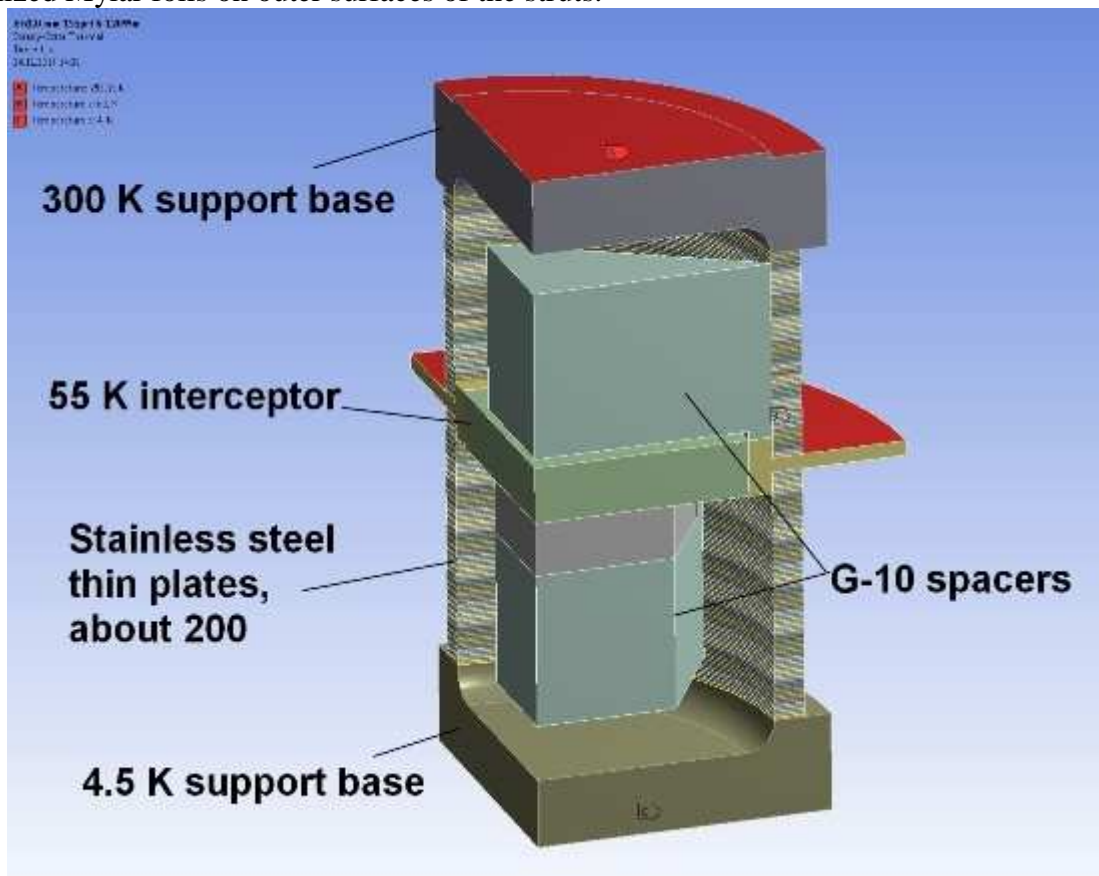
View of the support struts. It consists of stainless steel plates of about 200 pieces. Inner G-10 block spacers fix position of the stainless steel plates fixing the plates position from horizontal movements.
